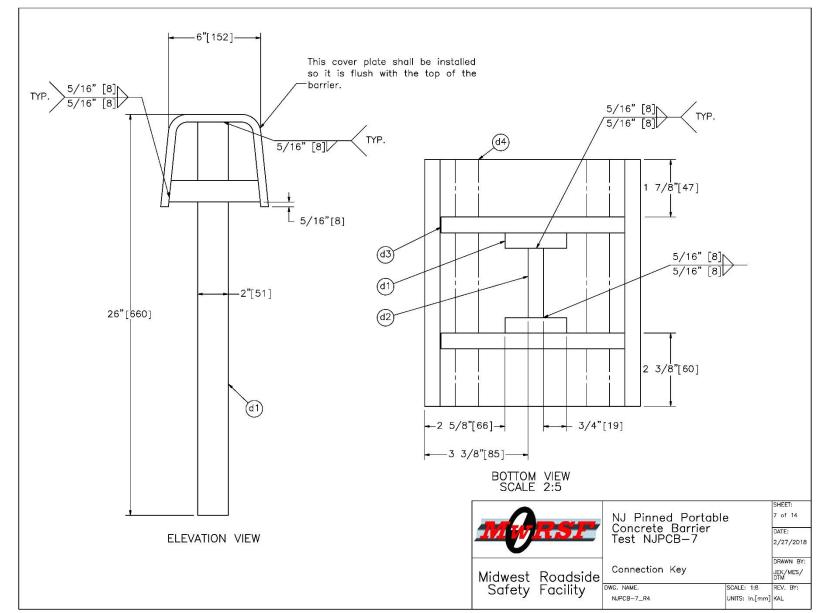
PCB Connection Key Assembly Details, Test No. NJPCB-7
